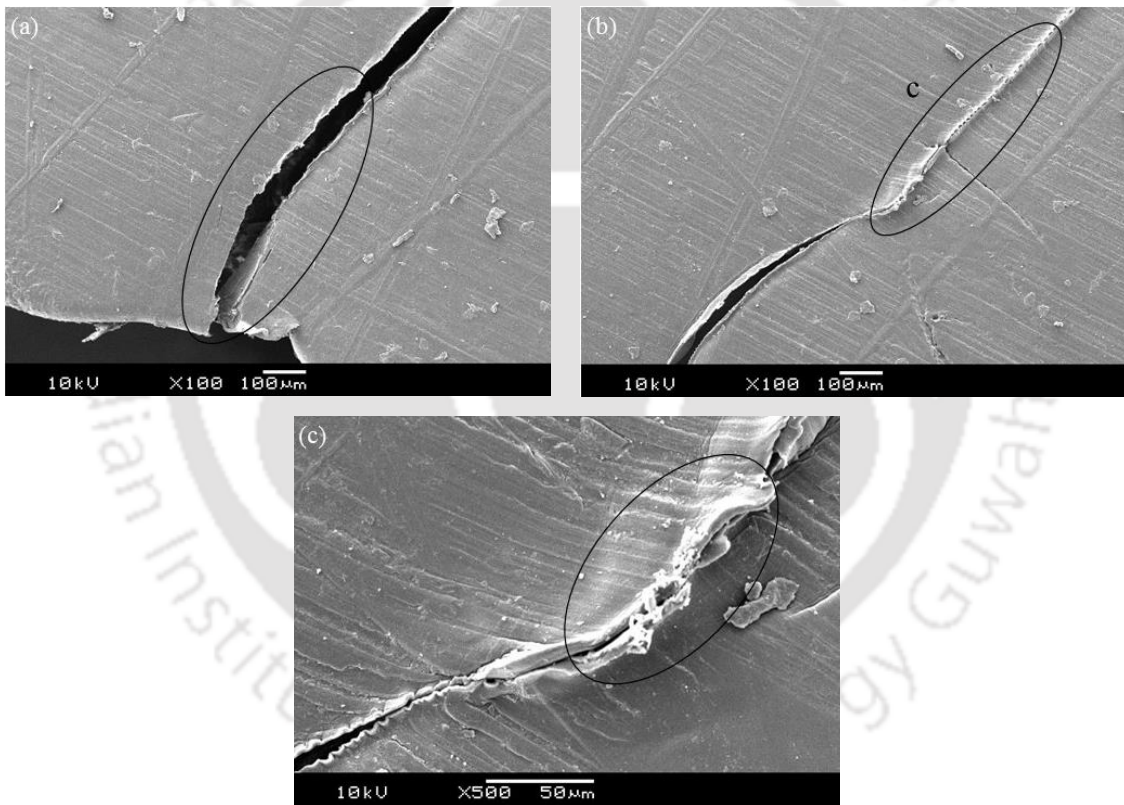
Root crack of test gear showing (a) straight crack: uni-directional 7.5 Nm load, (b) overlapping of fractured surfaces: uni-directional 7.5 Nm load and (c) close-up view of region marked as c in the Figure 5.13(b)
